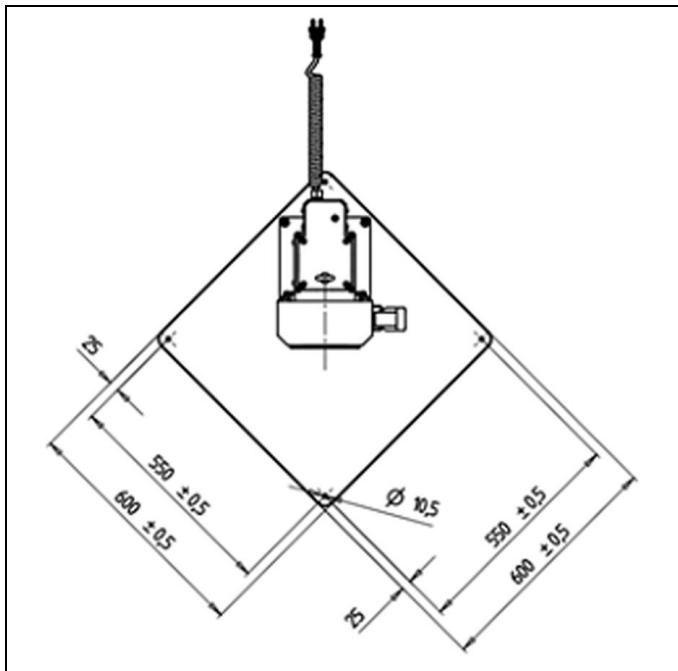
Base plate with mounting holes (4x \varnothing 10.5 mm)
